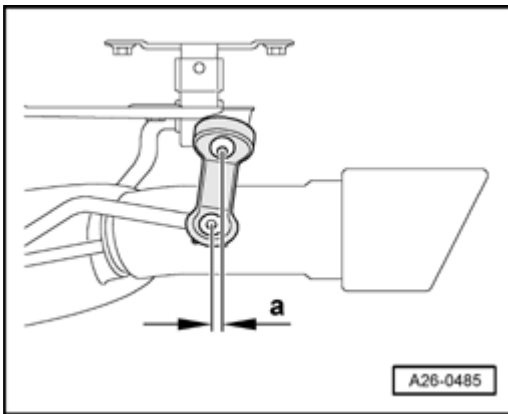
Pushing Exhaust System Toward Front Of Vehicle
